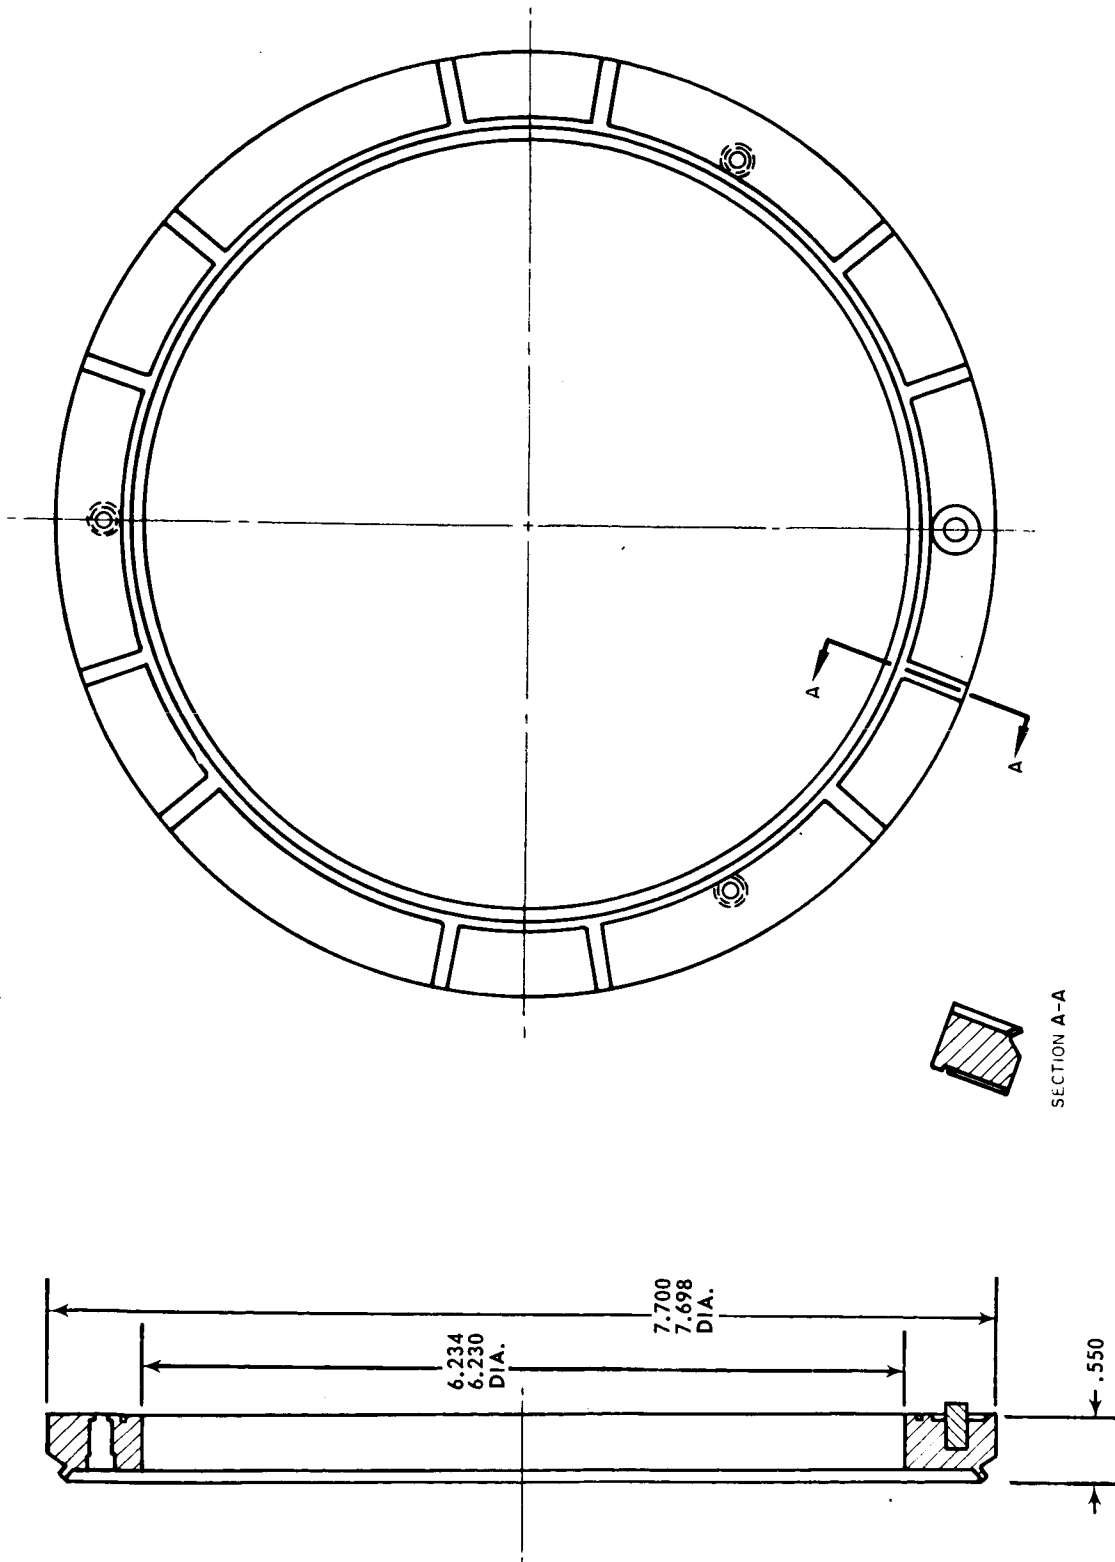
Bellows Front Fitting For Face Contact Bellows Secondary Seal
